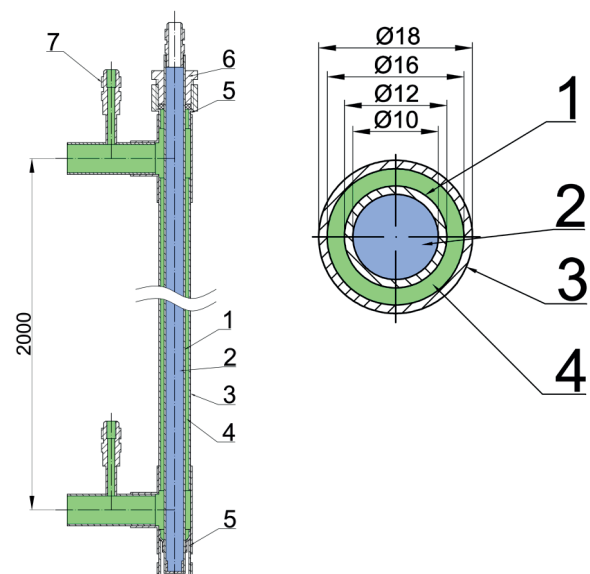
Schematic view of shell-and-tube thermal energy storage (TES): 1 – inner tube, 2 – phase change material (PCM), 3 – outer tube, 4 – heat transfer fluid (HTF), 5 – leading ring, 6 – seal assembly, 7 – thermocouple mounting port
